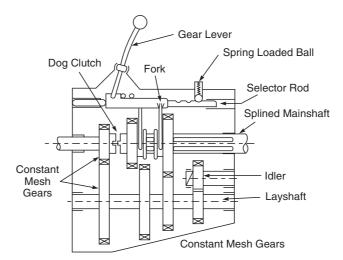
Three Speed Sliding Type Gear Box in First Gear
